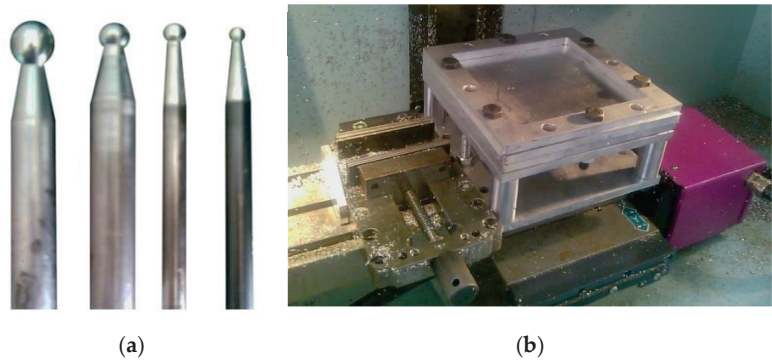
(a) Forming tools with different diameters, (b) fixture rig on the CNC machine table.
